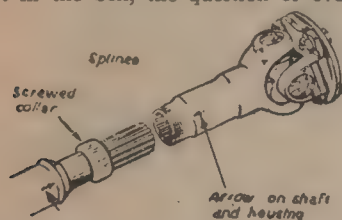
If a Hardy-Spicer propeller shaft is uncoupled as shown, the arrows on shaft and housing must be in line on reassembly.
